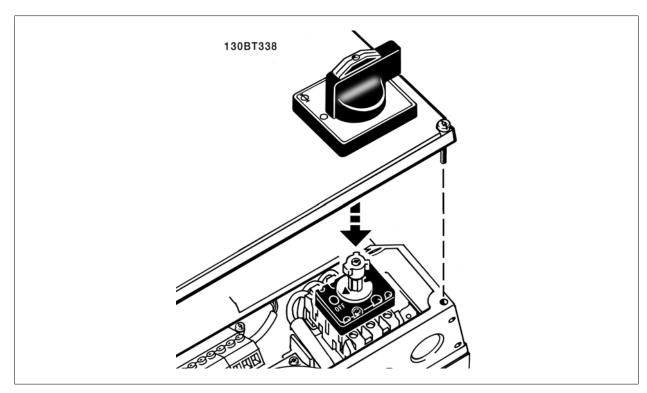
Assembling of IP21 / IP55 / NEMA TYPE 12 housing with mains disconnector.
